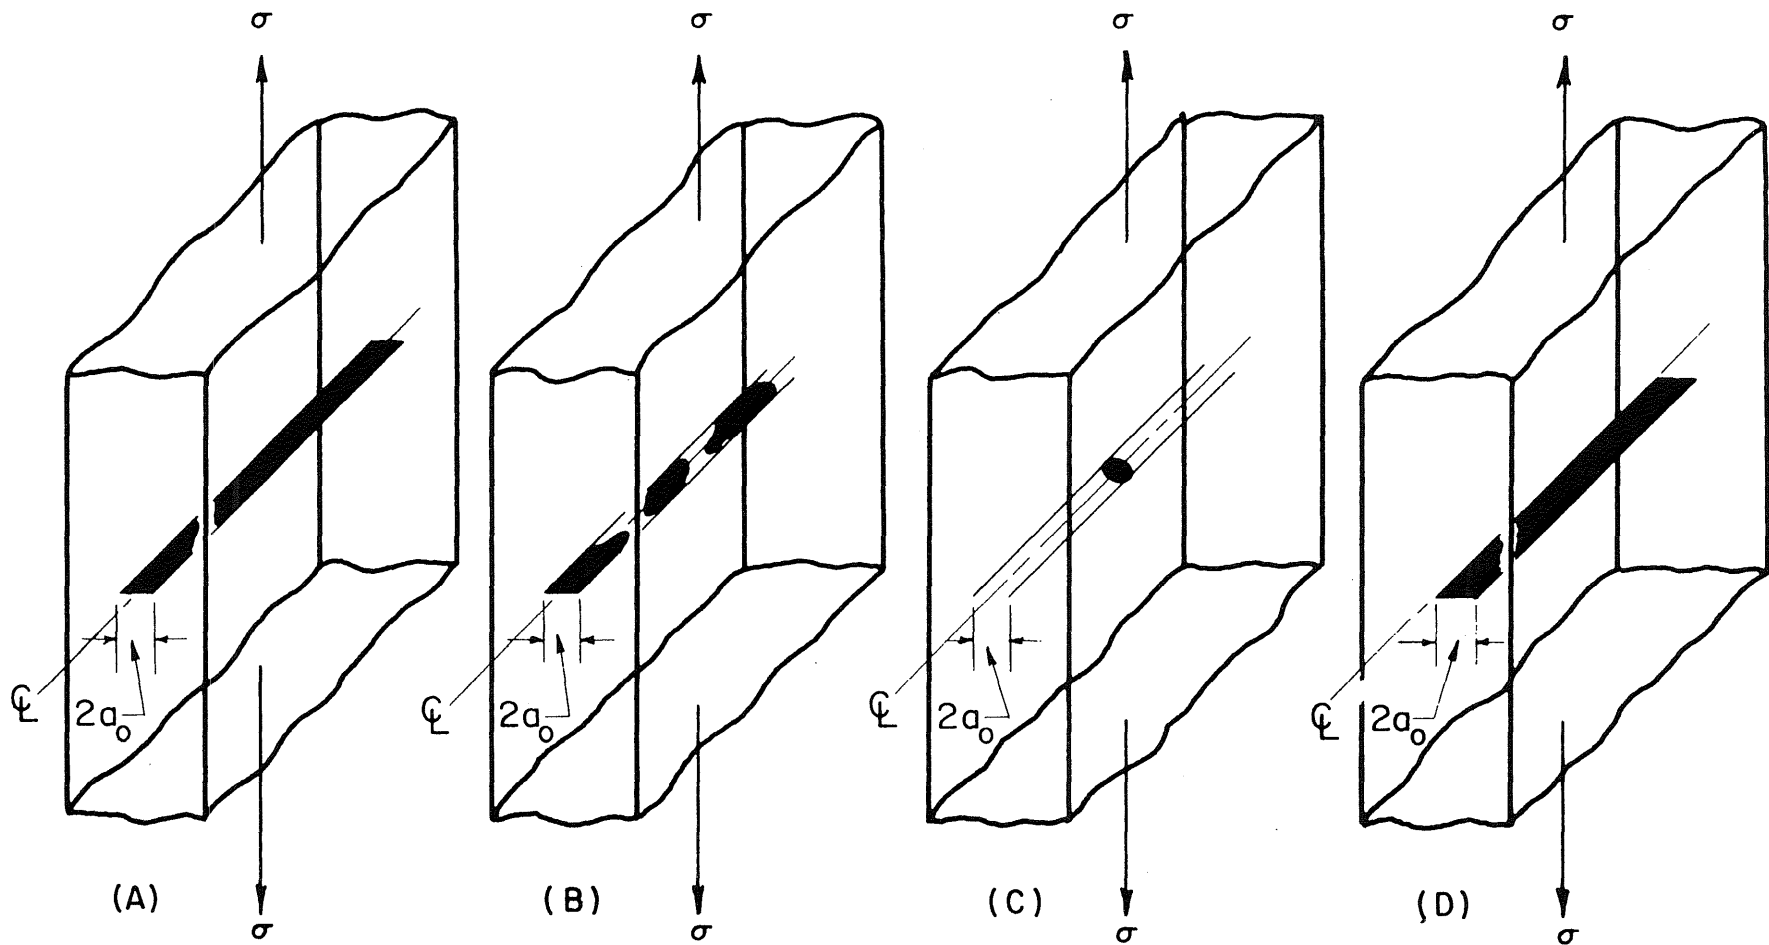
MODEL FOR FLAWED WELDMENT : DISC-SHAPED CRACK IN AN INFINITE BODY
